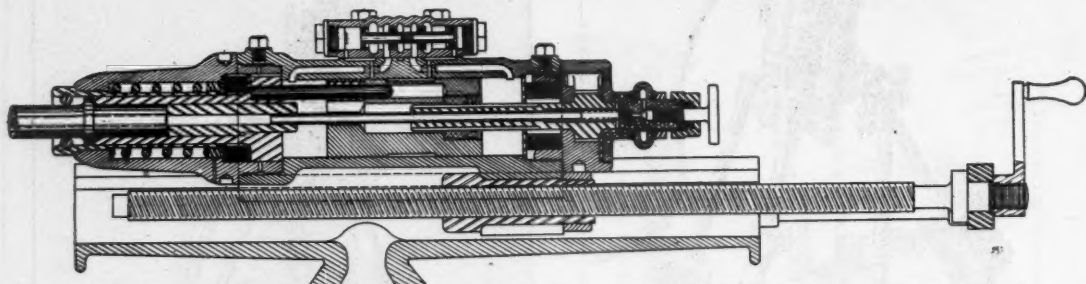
LEYNER DRILL—THE FIRST HAMMER DRILL WITH THE WATER FEATURE.
